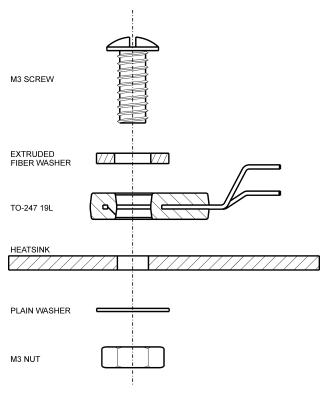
Screw Mounting Through A Heat Sink Using A Nut
